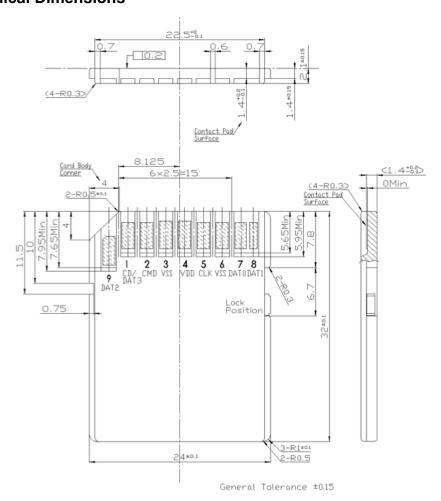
Innodisk Industrial SD Card mechanical dimensions
